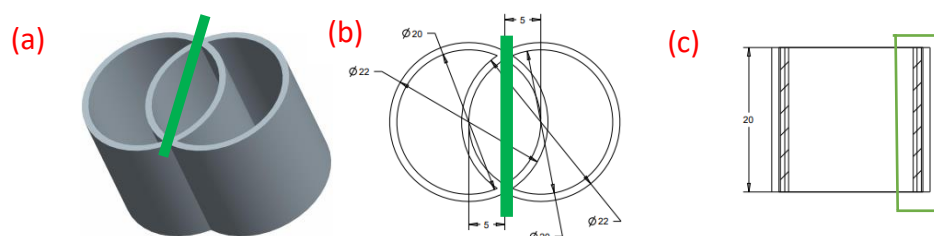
(a) Sectioning of test structure A-model, (b) engineering drawing top view, (c) side view with cross-area.
